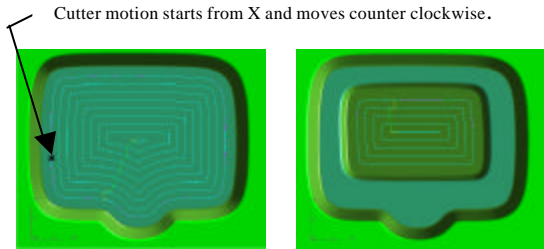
The material engagement and the adaptive feedrate control for machining the example part (using flat-endmill, taper-endmill, fillet-endmill and ball-endmill)
